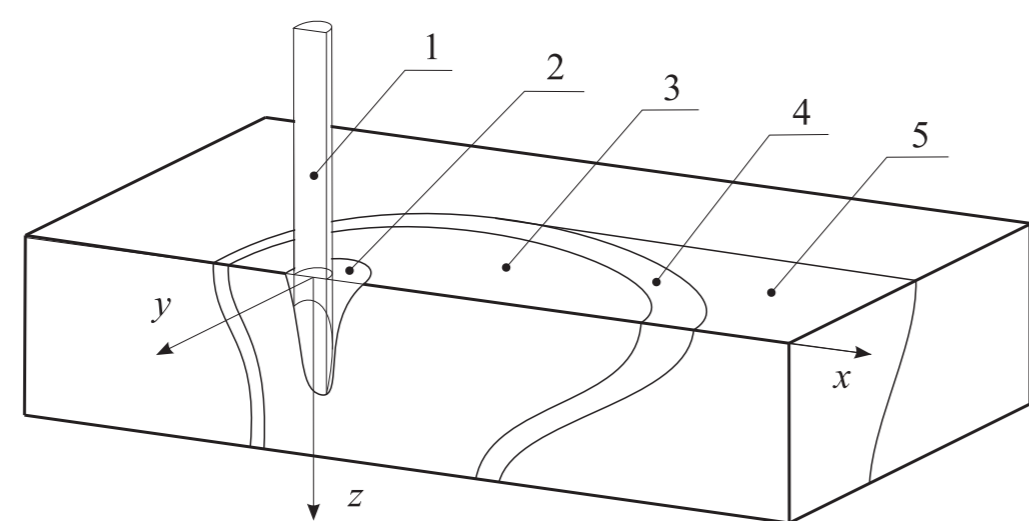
Layout of the weld zone: 1 — laser beam, 2 — steam channel, 3 — liquid phase zone (welding pool), 4 — two-phase zone, 5 — solid phase.
